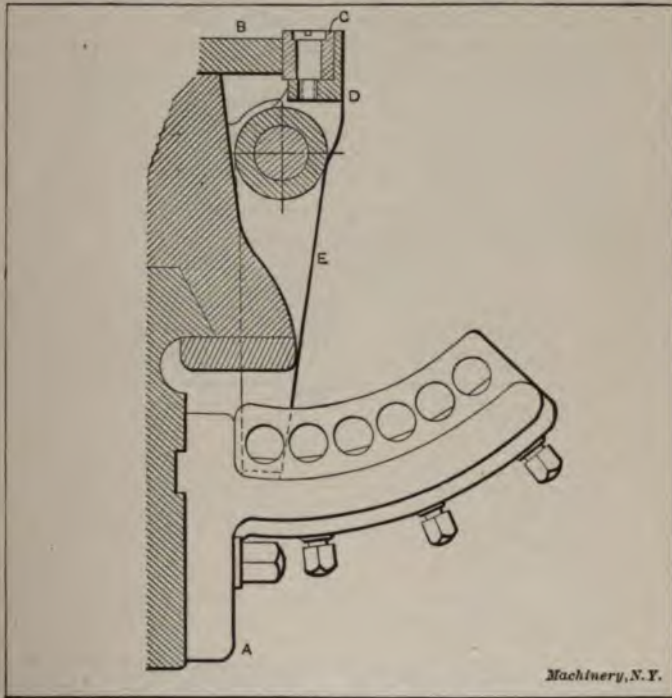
Turret Lathe Stops used on the Pratt & Whitney Turret Lathes
